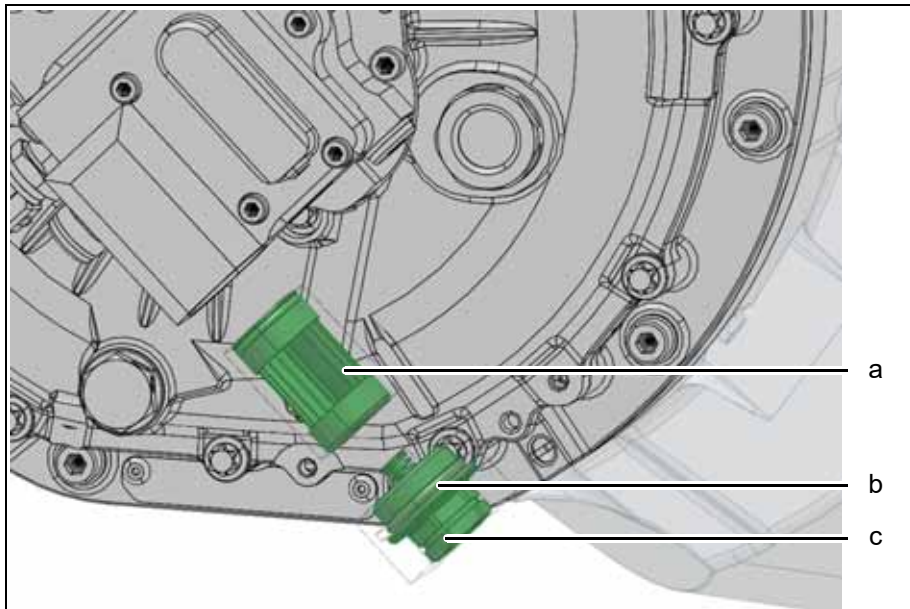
Gearbox oil filter assembling (CD-170)
